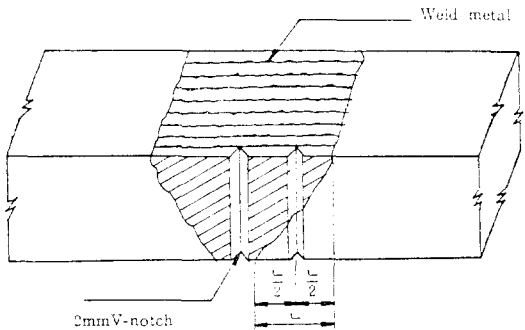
Notch locations of weld metal and heat affected zone of in-air welds and underwater welded joints
